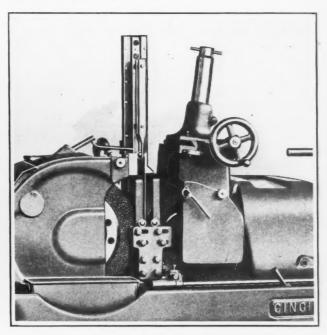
Hydraulic Loading Attachment Used in Grinding Steel Balls
